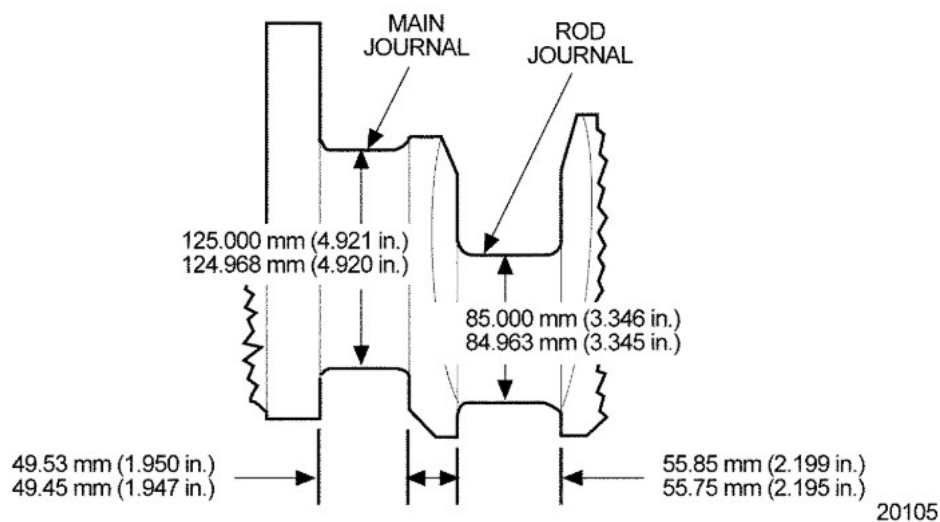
Diameters and tolerances considered in this work [5]
